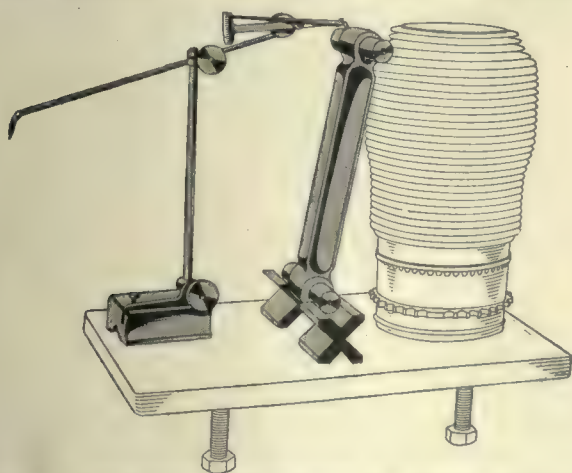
CHECKING ALIGNMENT OF CONNECTING-ROD BUSHES
